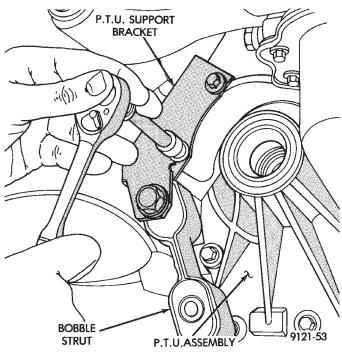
Remove P.T.U Support Bracket and Bobble Strut Assembly
